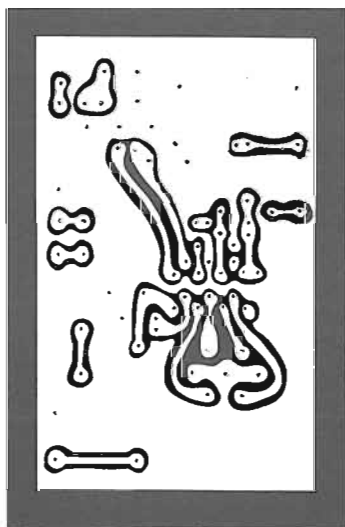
Recommended layout of printed-circuit board for TV-receiver sound strip utilizing RCA-CA3042. (Bottom View)
